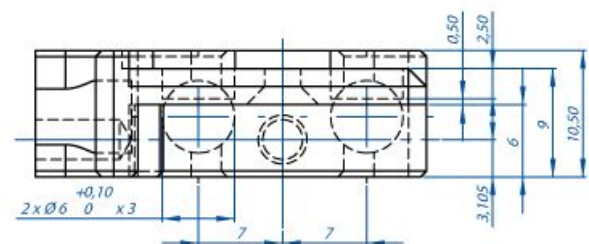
Display mount dimensions for metal packaging versions (unit: mm)
